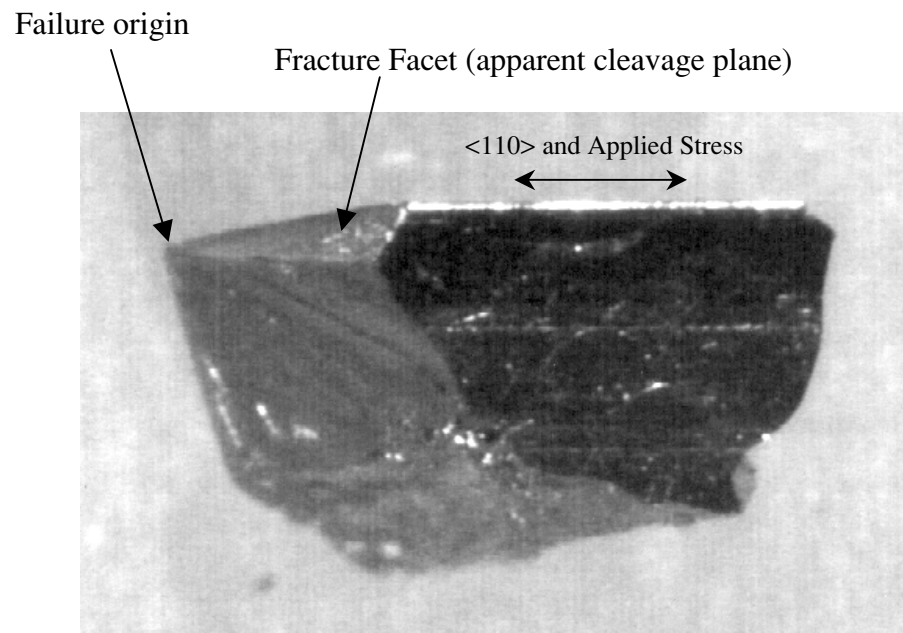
Side view of a segment from a fractured AFN12 <110> four-point flexure test specimen.
